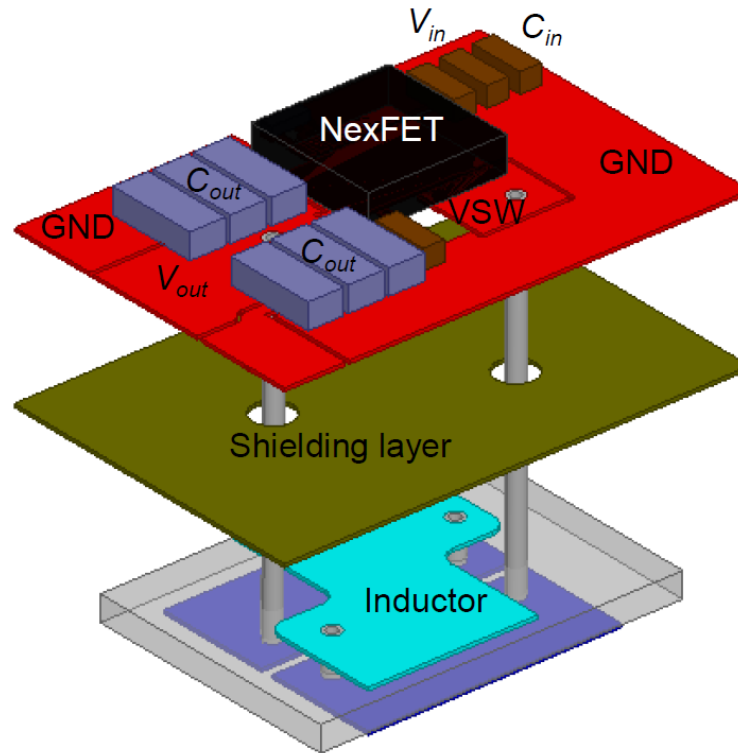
The expanded view of the 4-layer PCB structure for the 3D integrated POL module with embedded core.
